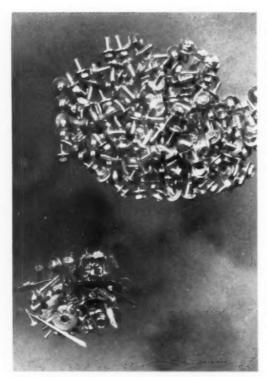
The machine tried unsuccessfully to assemble relays with contaminants (below) received in vendor's shipments of assembly screws.
